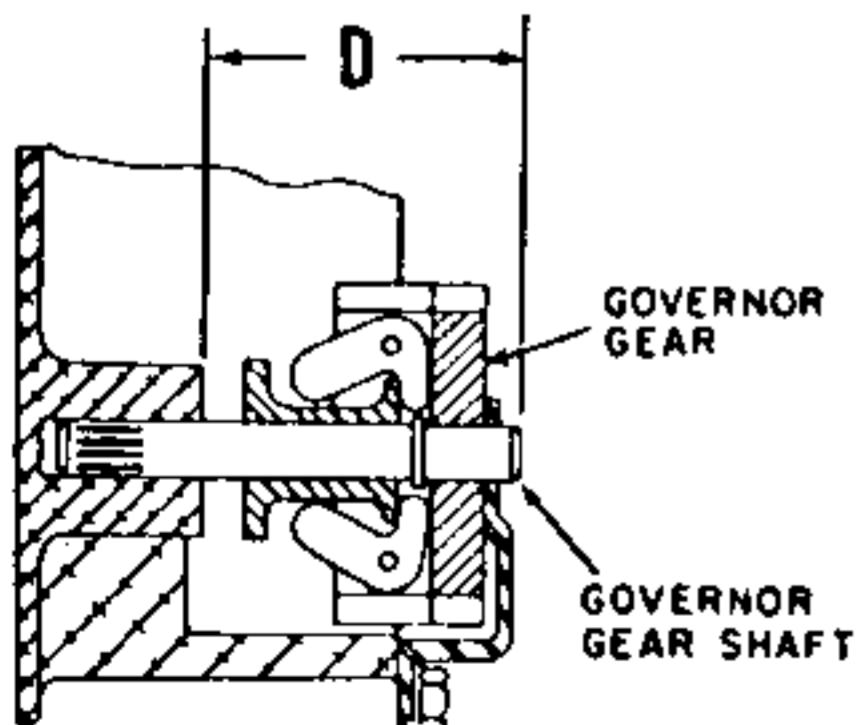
Correct installation of governor shaft and gear and weight assembly on Models HH70, HM70, HM80 and HM100. Dimension (D) is 1- $\frac{3}{4}$ inches (34.9 mm) on Models HM70, HM80 and HM100 or 1- $\frac{17}{64}$ inches (32.1 mm) on Models HH70.
